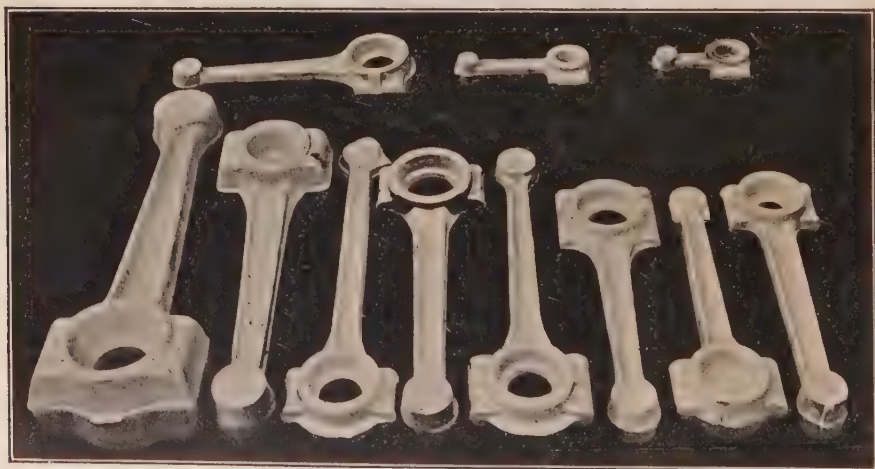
ALUMINUM FORGINGS. CONNECTING RODS MADE FROM 25S ALLOY.
